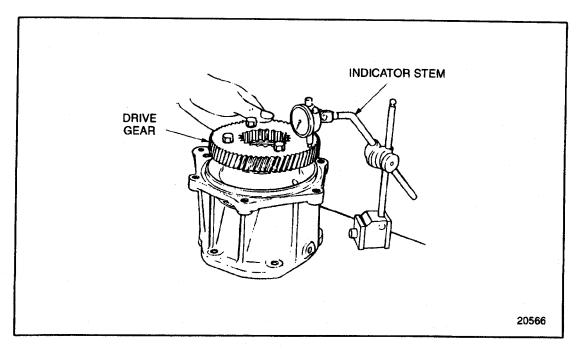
Air Compressor Drive Shaft Installation (Former Design)
